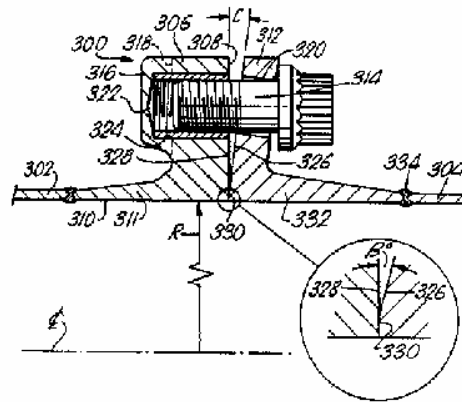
Fluid-Tight Joint With Inclined Flange Face, US Patent 5,230,540
